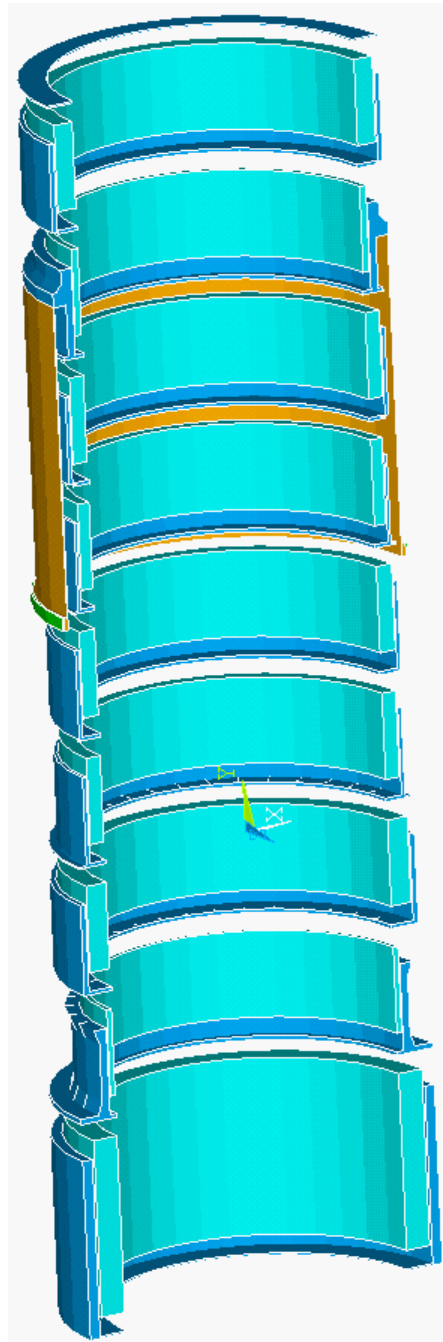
Expanded Assembly View Showing Shell Stack-up for Vertical Assembly. The yellow "skirt" is an axisymmetric representation of flexure cold mass supports that were not used.
